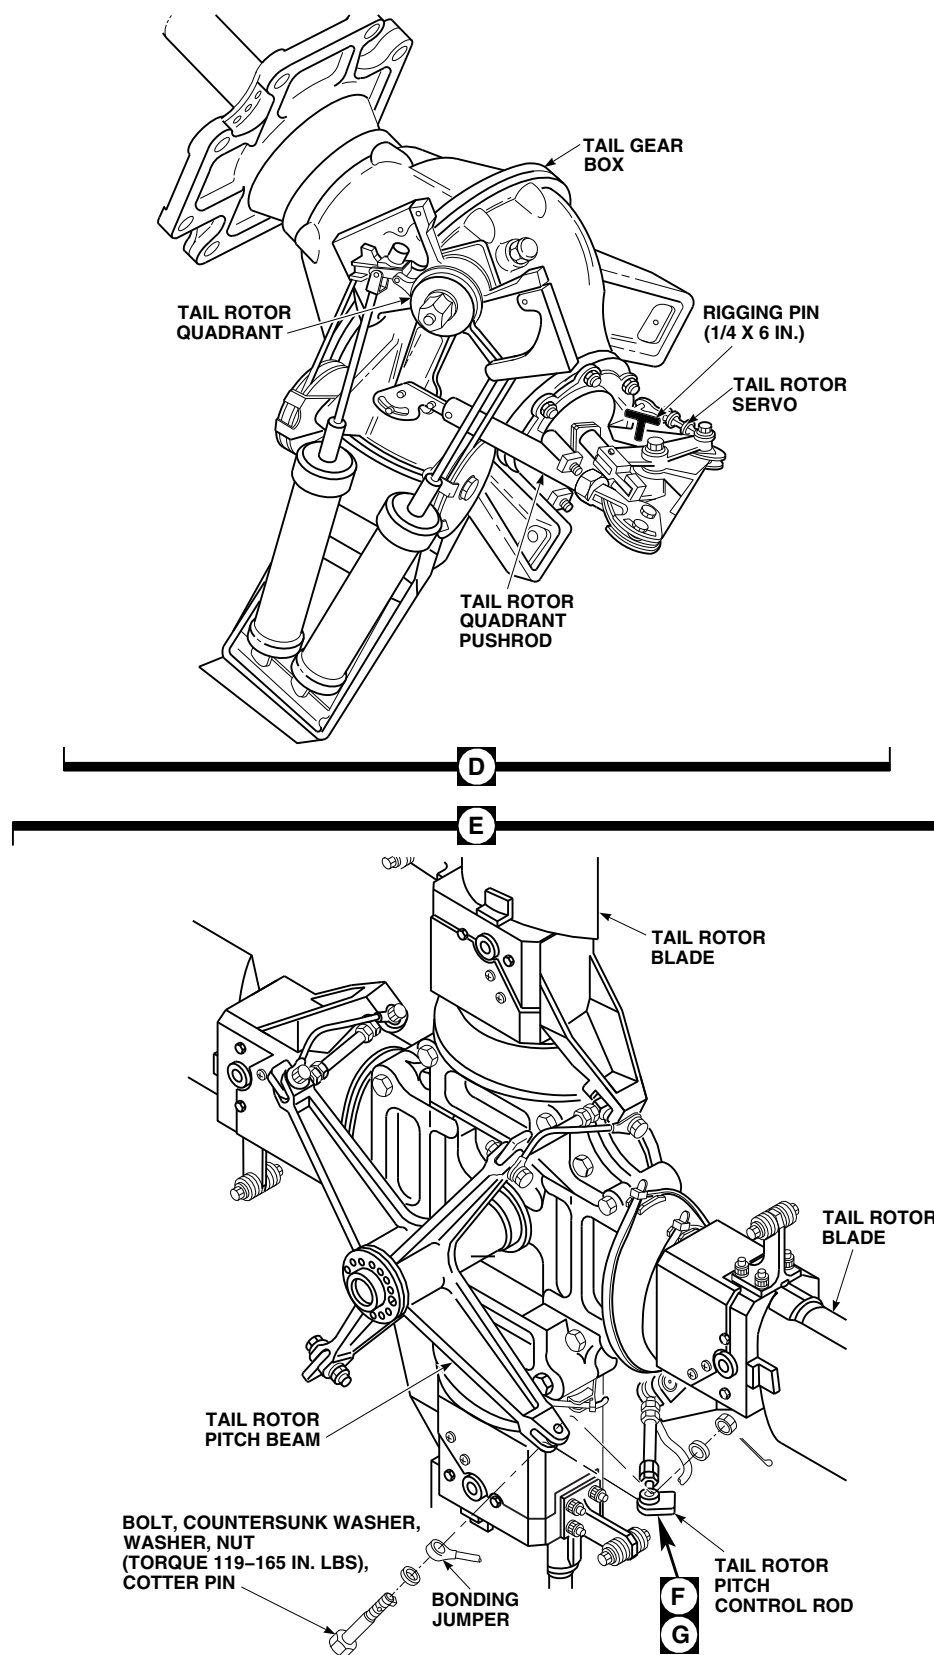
TAIL ROTOR SYSTEM RIG CHECK (SHEET 3 OF 5)
